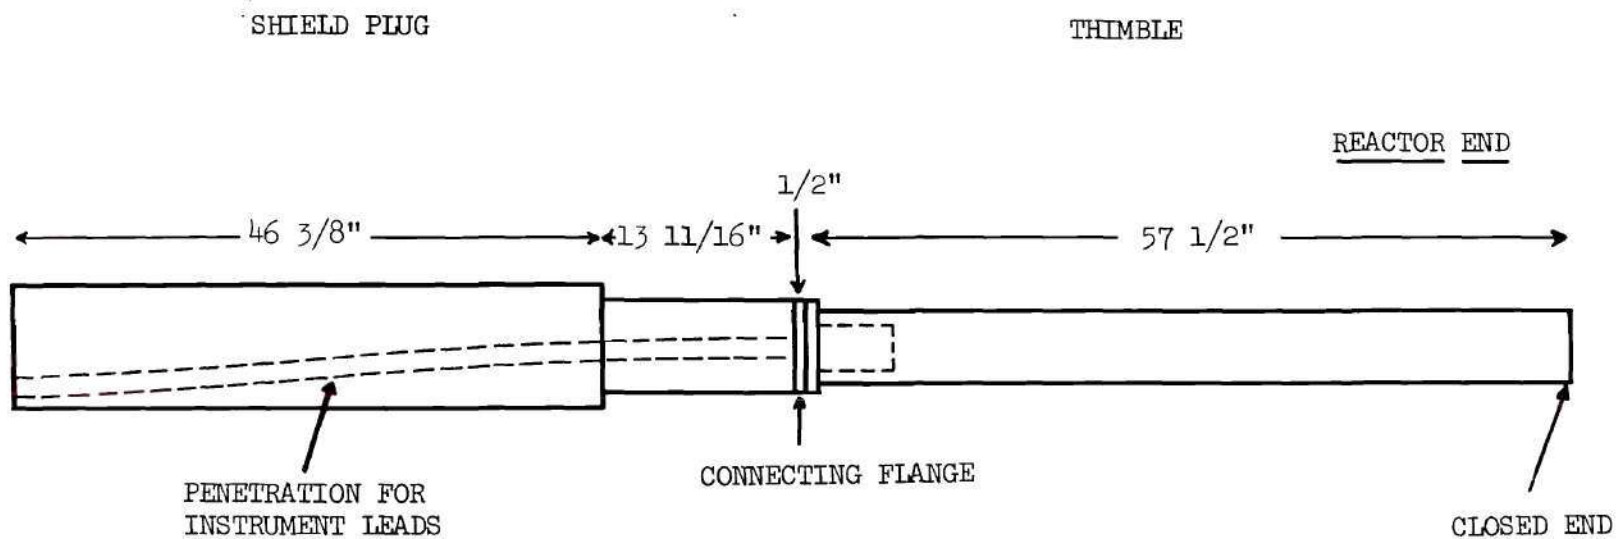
Special Shield Plug Assembly for GTRR Position H-11
